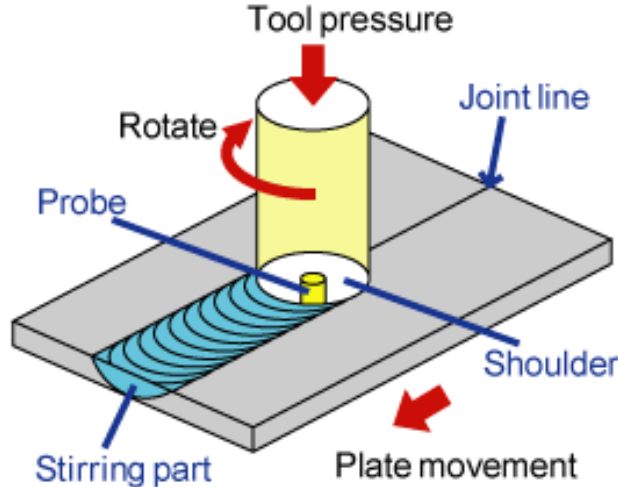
Schematic of Friction Stir Welding process
